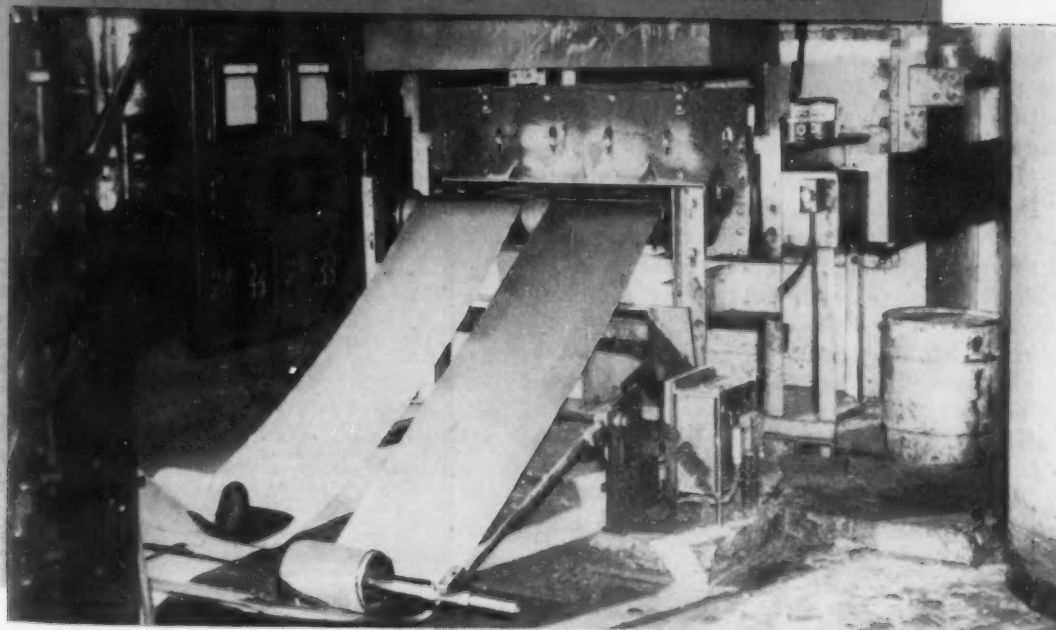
New type 4-high reversing single stand cold mill which is particularly effective for producing intermediate and light-gage silicon ferrite. The mill drive is on the 15-in. diam backup rolls. Each of these rolls is driven by a 100-hp motor. Each reel is driven with a 75-hp motor. The 3-in. diam workrolls are tungsten carbide. Maximum speed of the mill is 1800 fpm. Courtesy of The Cold Metal Products Co.
